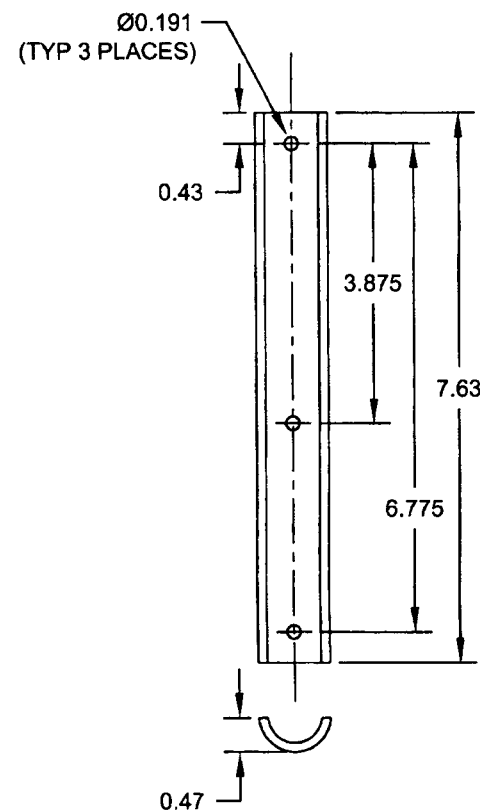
SADDLE (SHEET 3): Ø0.257 TYP 3 PL WAS Ø0.191 (TYP 3 PLACES) AS SHOWN:
